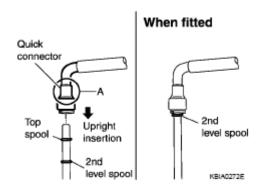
Inserting Fuel Tube Into Quick Connector Courtesy of NISSAN MOTOR CO., U.S.A.
